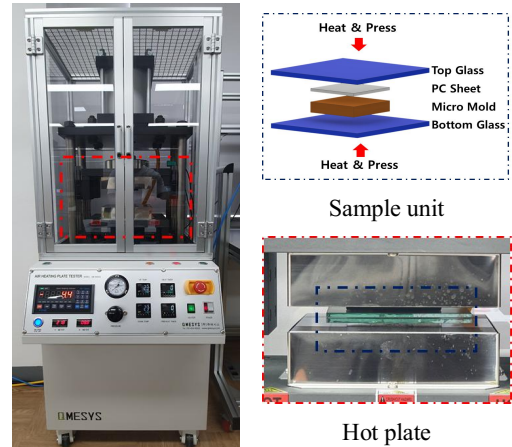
Glass plates, micro mold, and PC assembled specimen inserted into hot press
